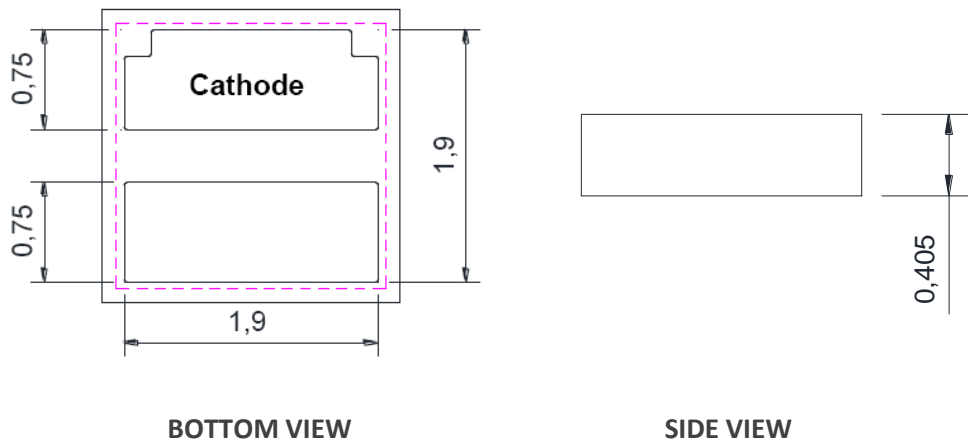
WICOP Z8Y22 Solder Pad Dimensions.
